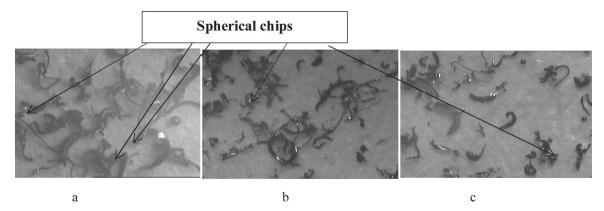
Microscopic view of grinding chips after 10 passes with 20 μmin feed under (a) dry condition, (b) wet condition using five port multi-nozzle cooling system, (c) wet condition using flood type copper cooling system
